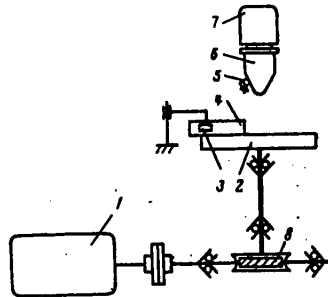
Mechanical Diagram of Machine for One-Side Grinding
